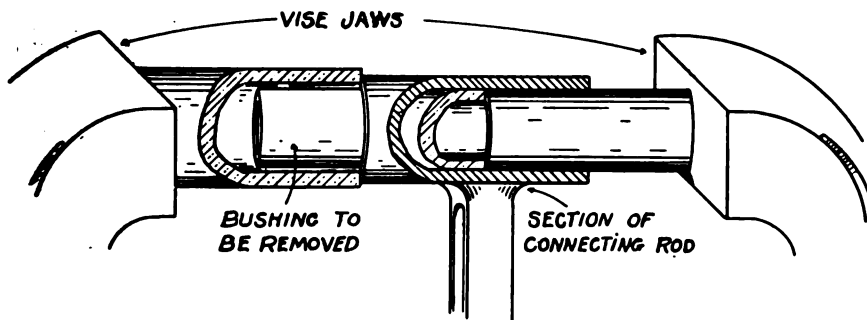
USING THE VISE TO PRESS THE WRIST PIN BUSHING OUT OF THE CONNECTING ROD
